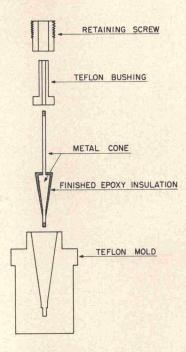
Component parts for a high pressure electrical lead and epoxy potting mold.
